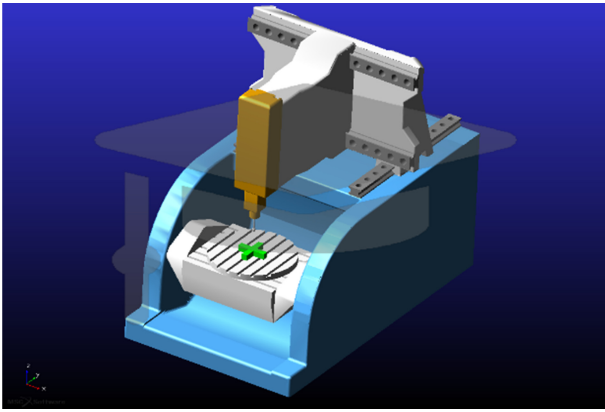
Five-axis machine tool (TRT-CA type) and the proposed cross-shaped calibration artifact
